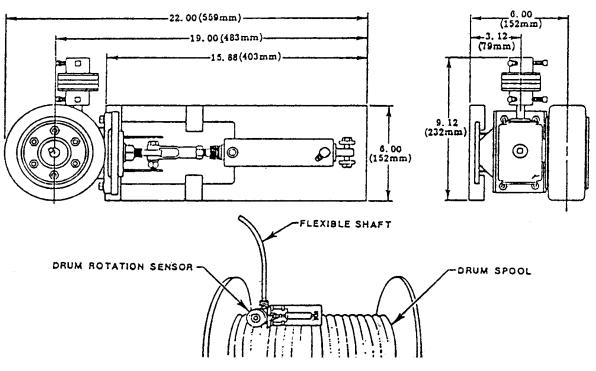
Drum Rotation Sensor Typical Installation and Overall Dimensions
